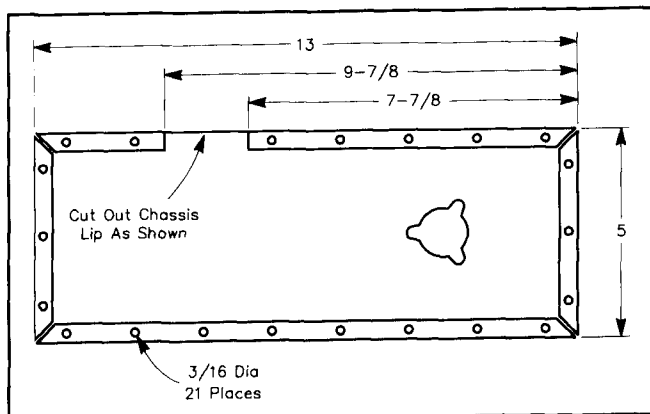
RF plate enclosure. Install blind fasteners in the 21 3/16-diam. holes.
